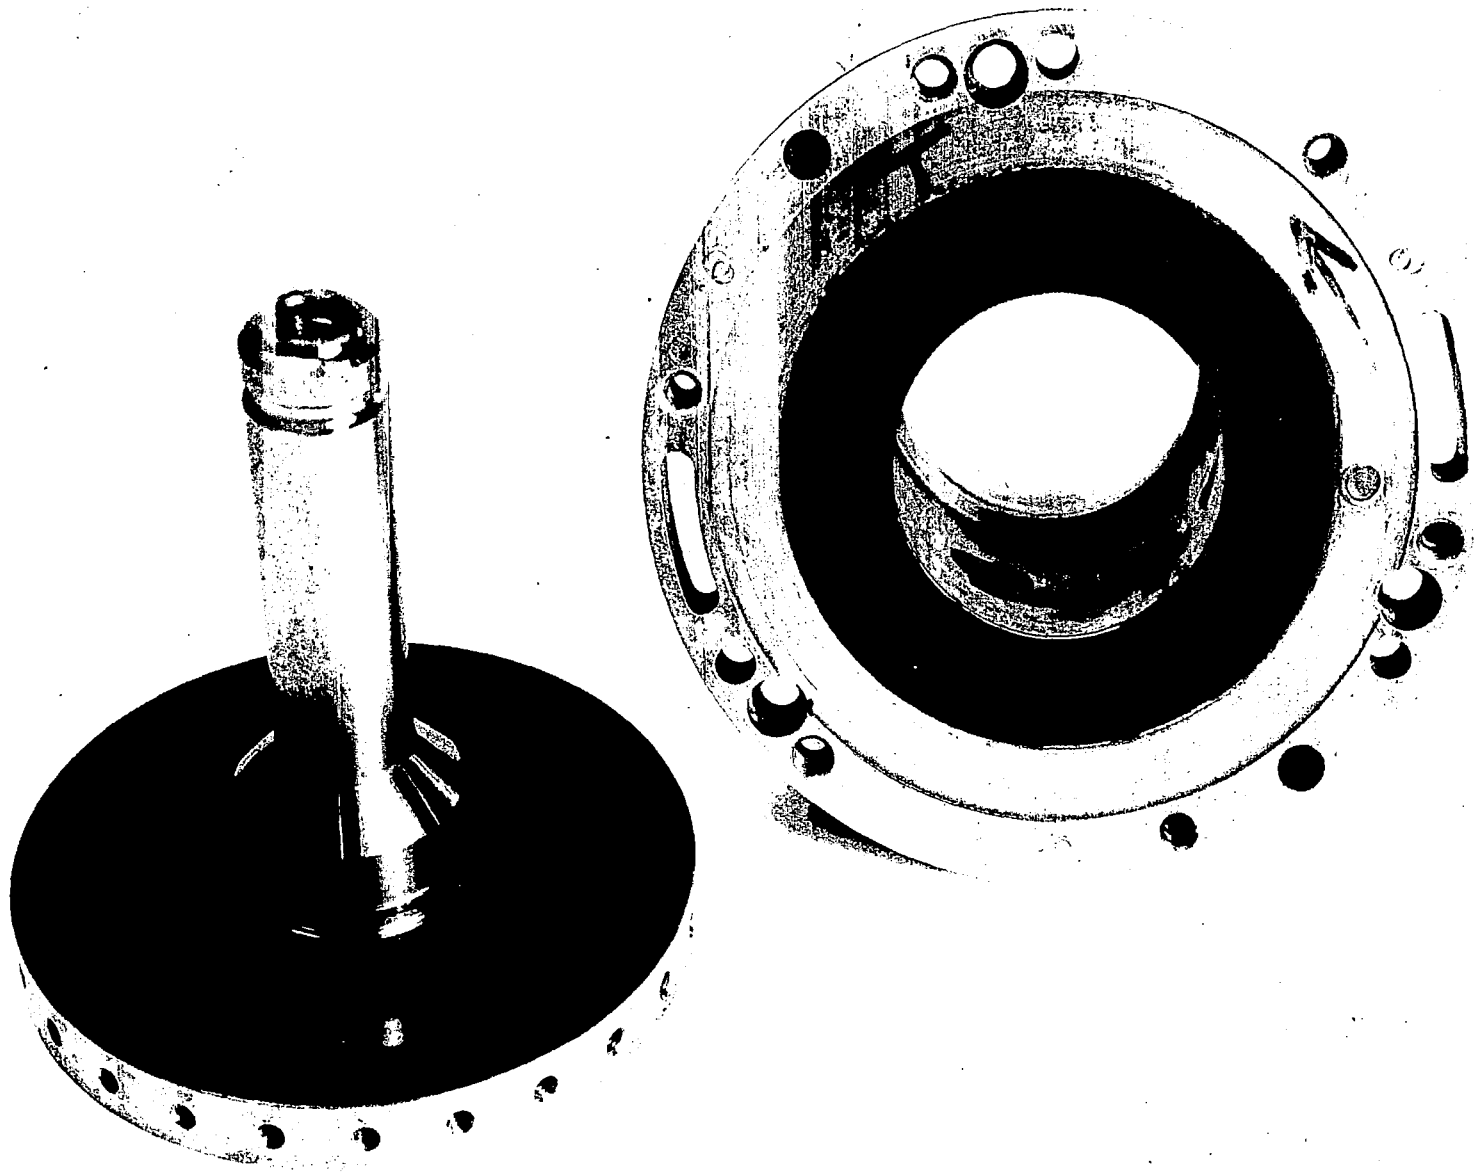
Reverse Thrust Plate and Runner Inspection 5
